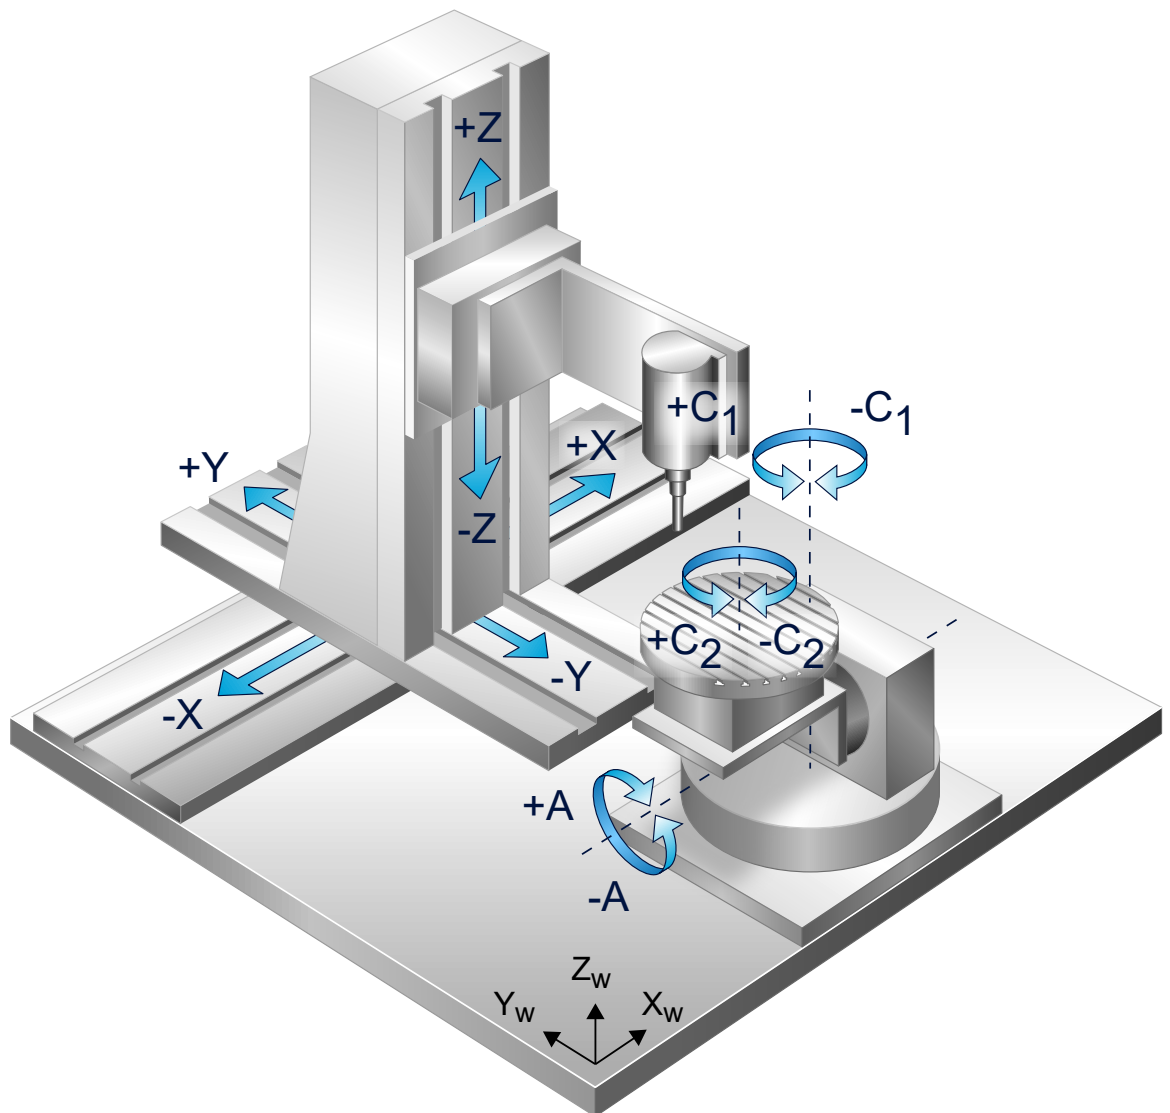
Kinematic structure of 6-axis machine with CAC workpiece table.
